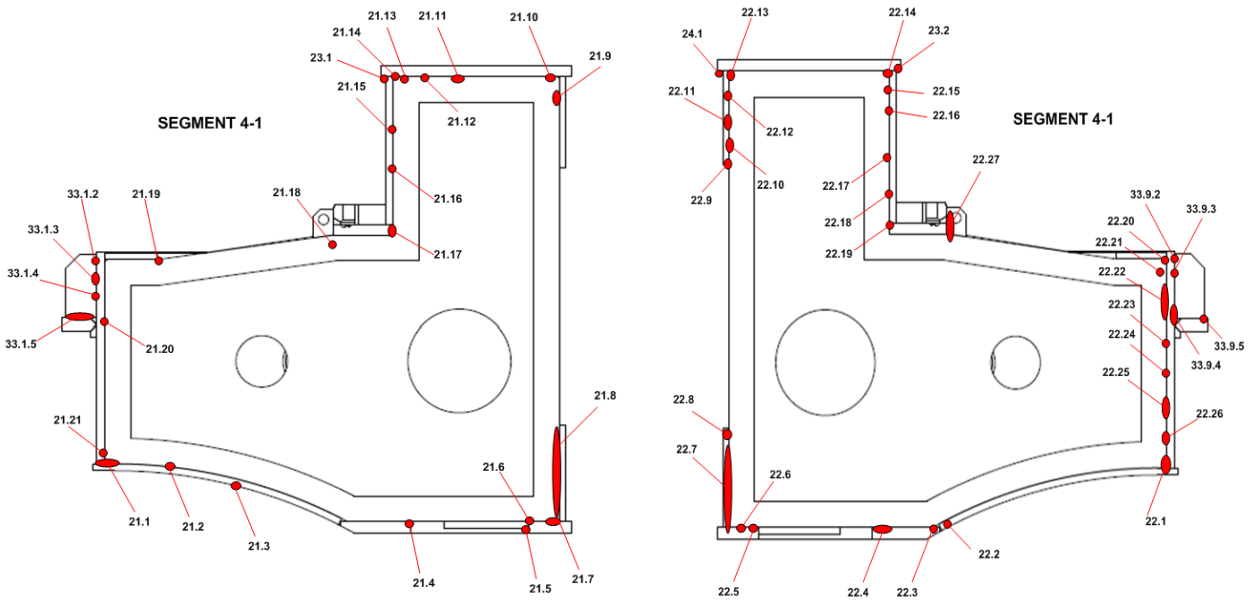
Results of magnetic particle testing (MT) performed at welded joints of a turbine cover segment
